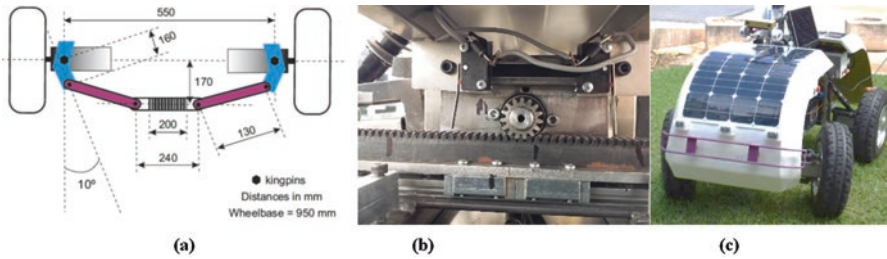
Steering design in scouting robots: (a) tie-rod assembly; (b) pinion-rack actuation; (c) caster angle
